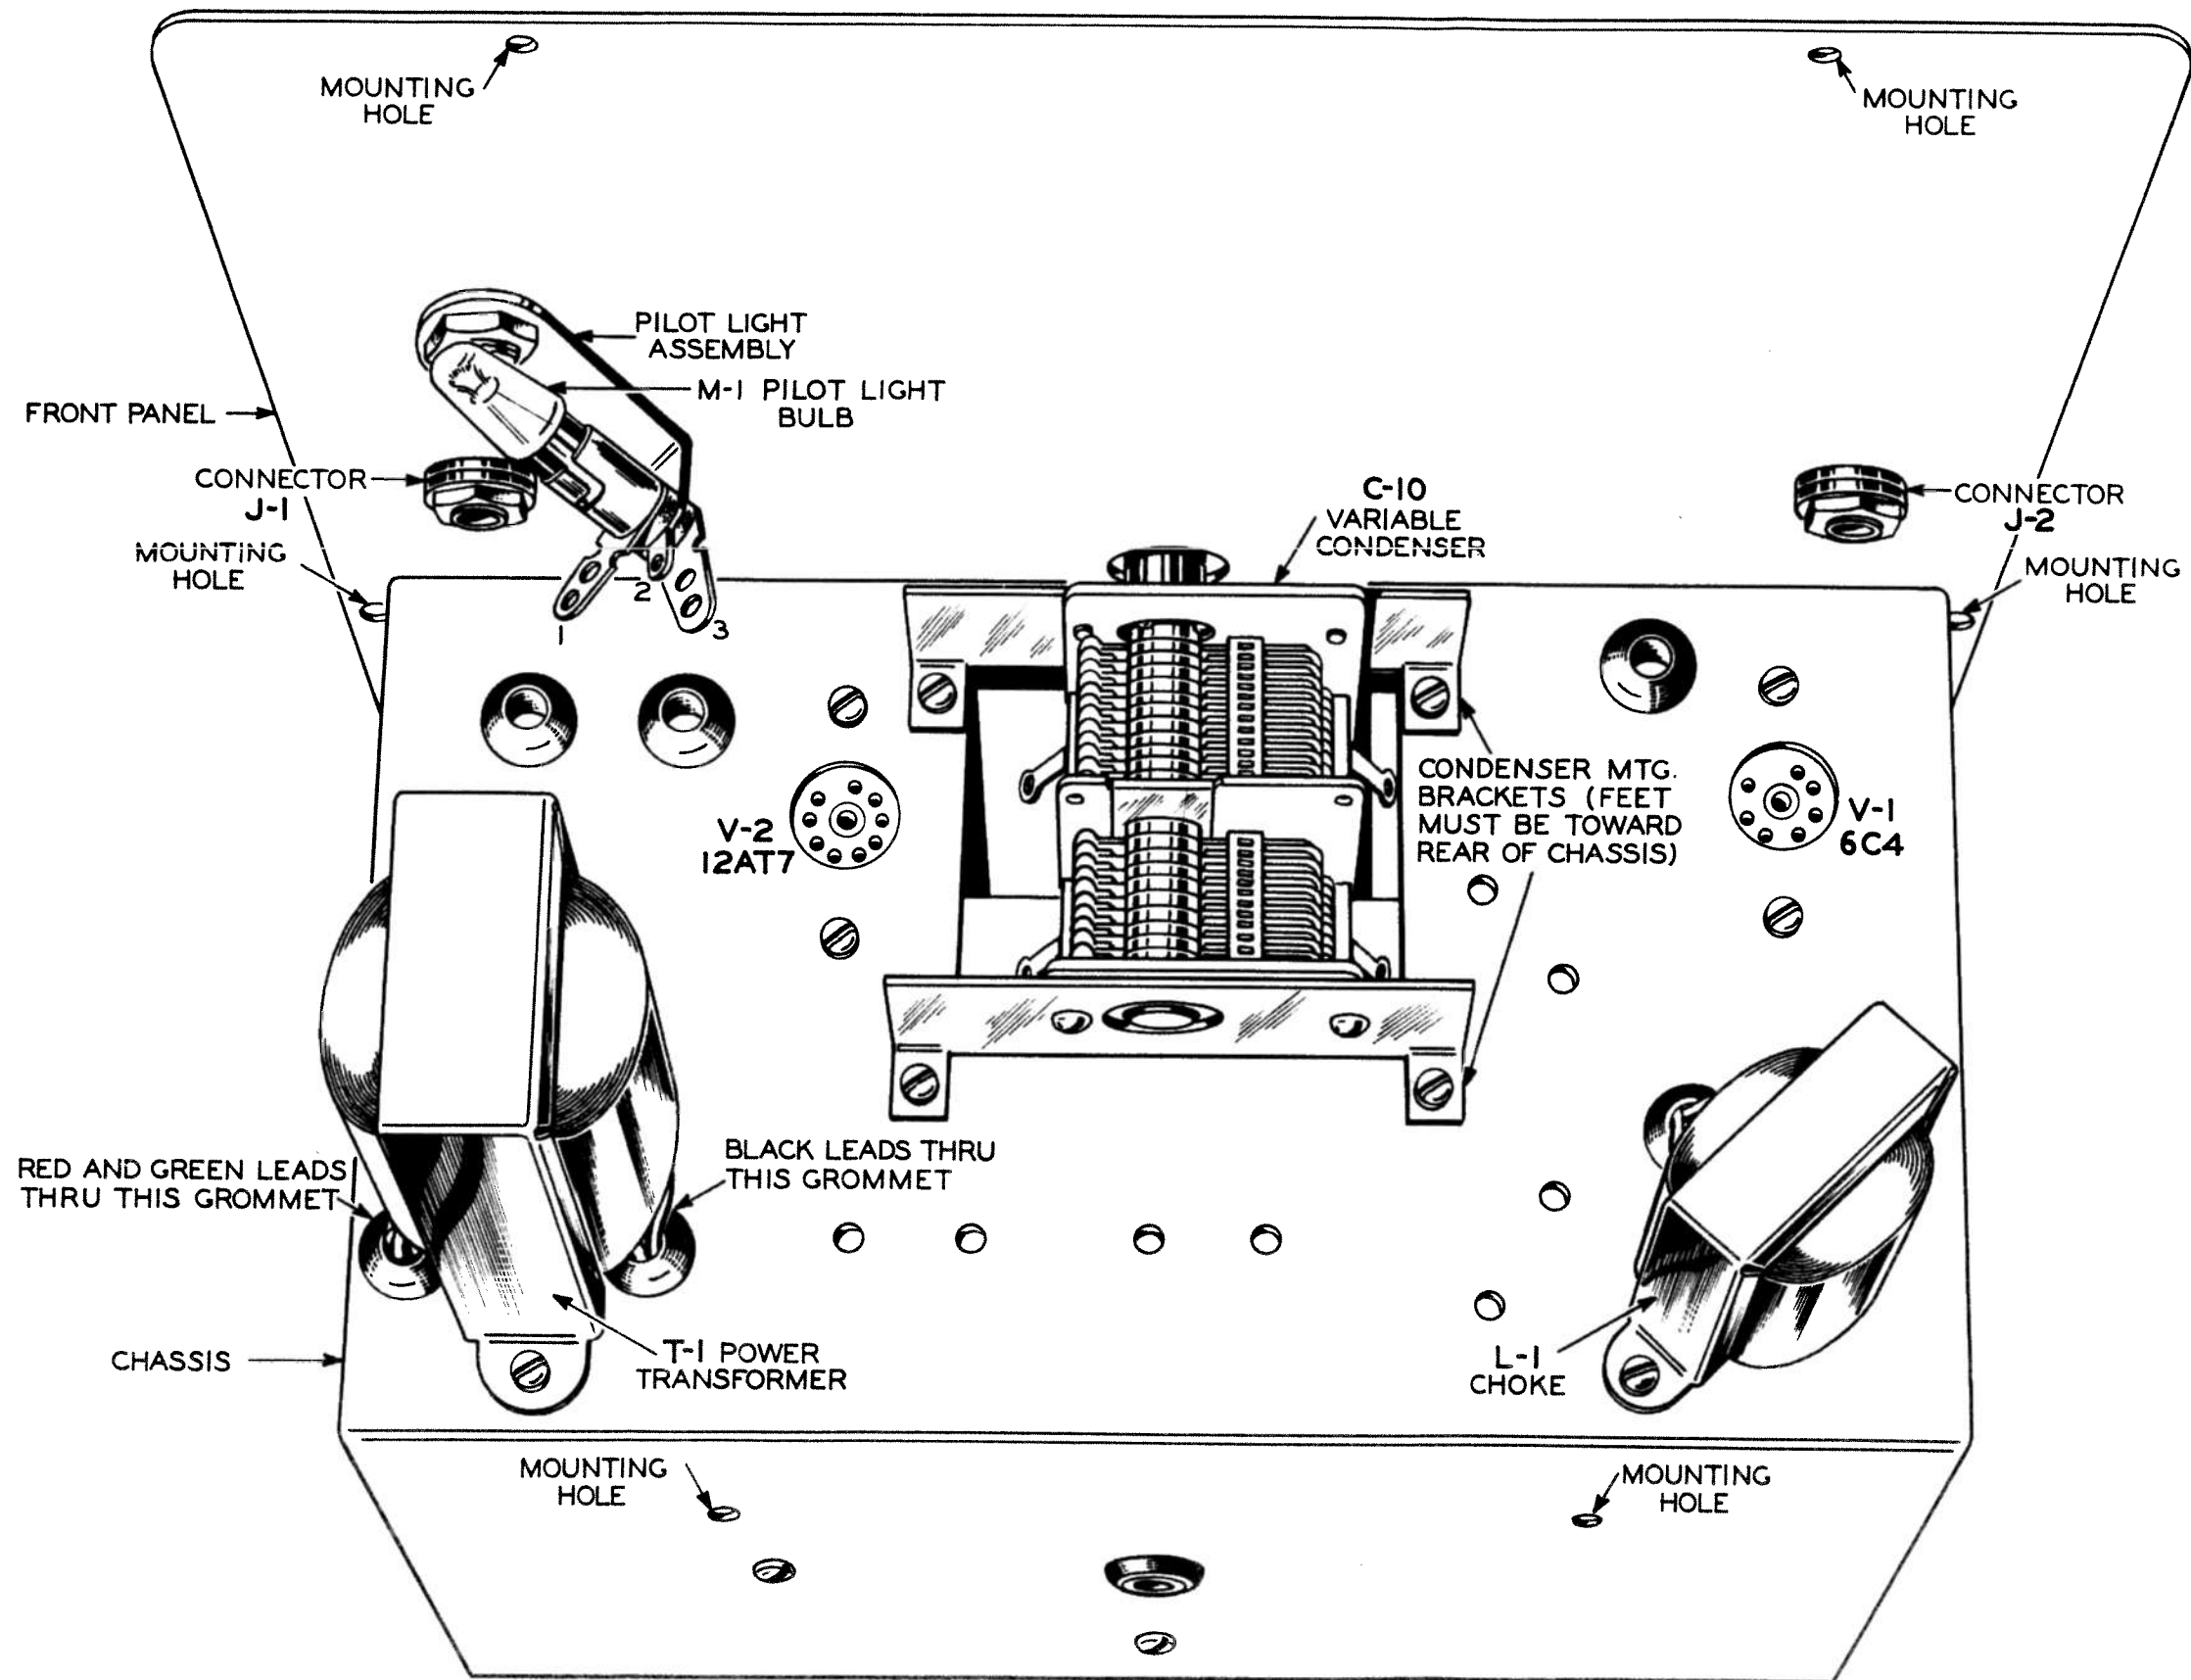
HOW TO MOUNT THE PARTS ON TOP OF THE CHASSIS.
